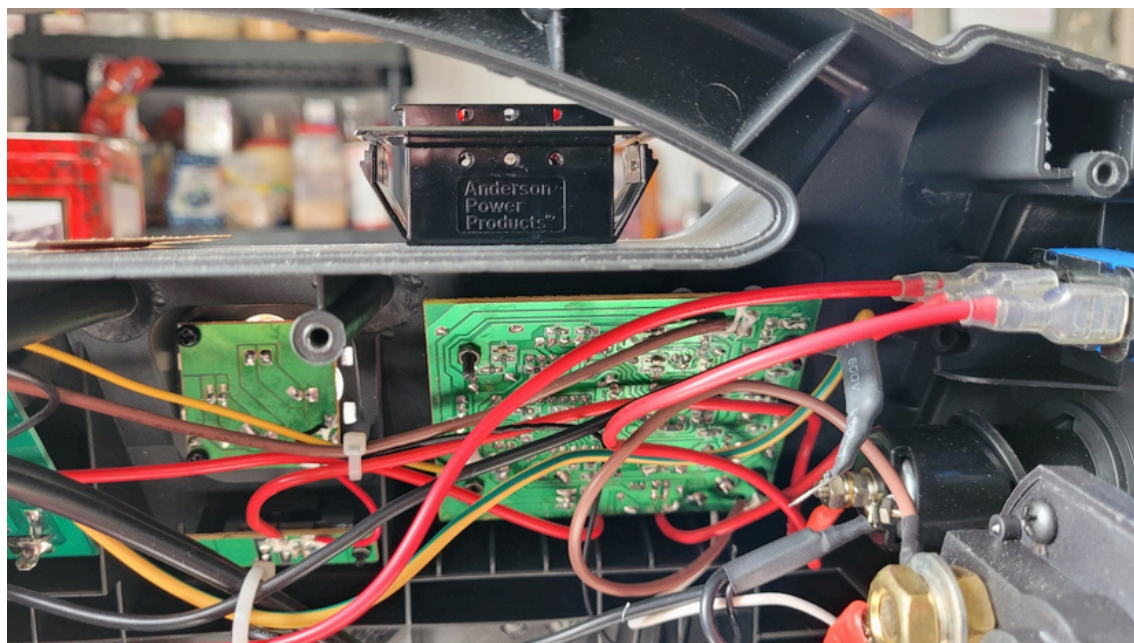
Final location for the PowerPole outlet. Checking clearance on the inside for the Power Pole outlet.
